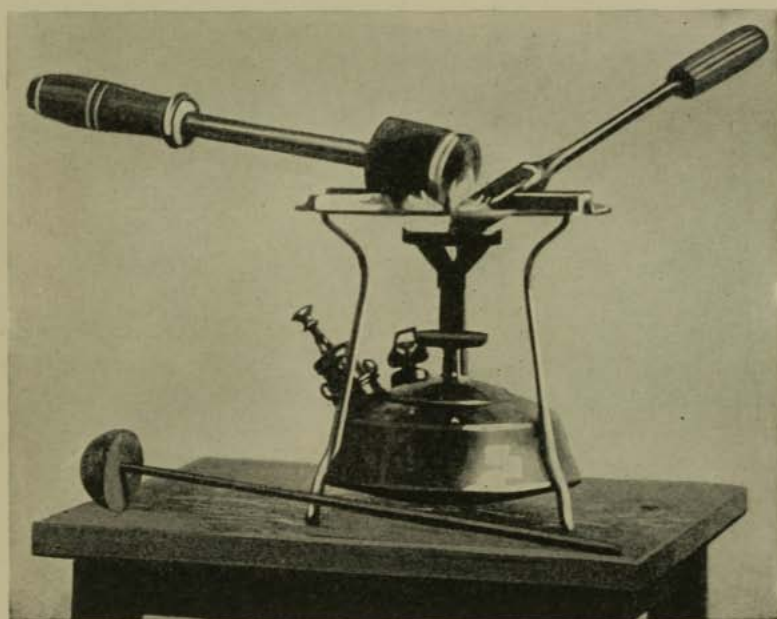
A kerosene stove which burns a gas flame for heating soldering tools.
